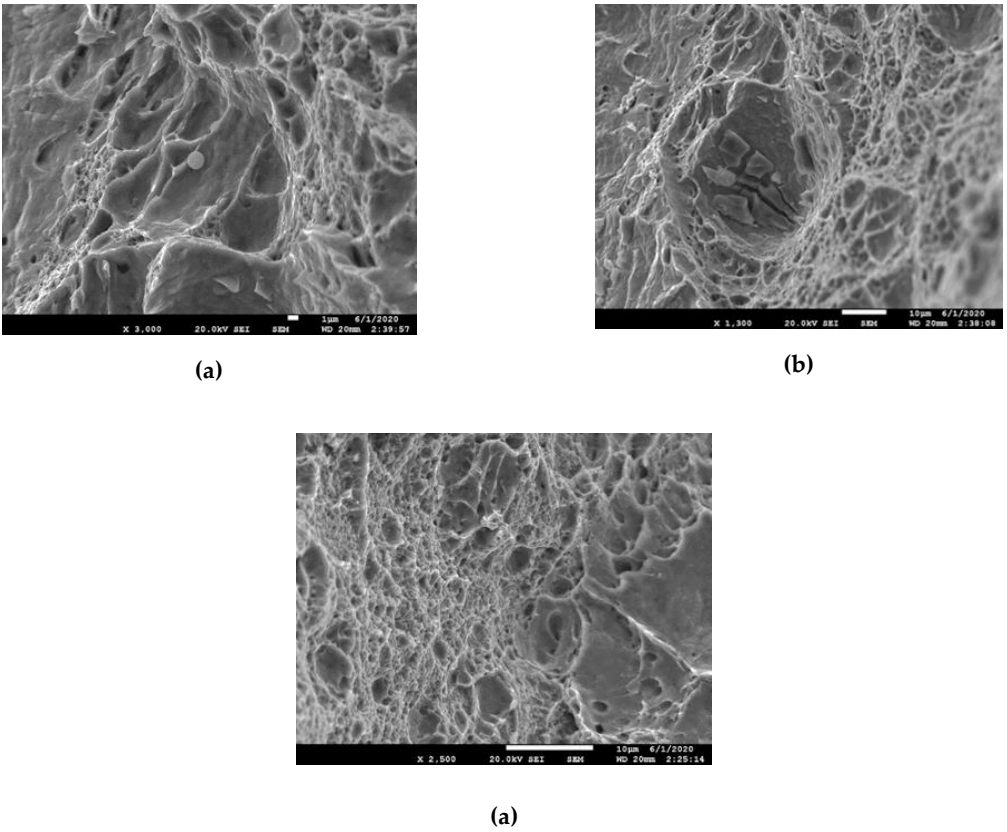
The fractured surface of the Hexagonal Family 2 (Samples 22-24)
